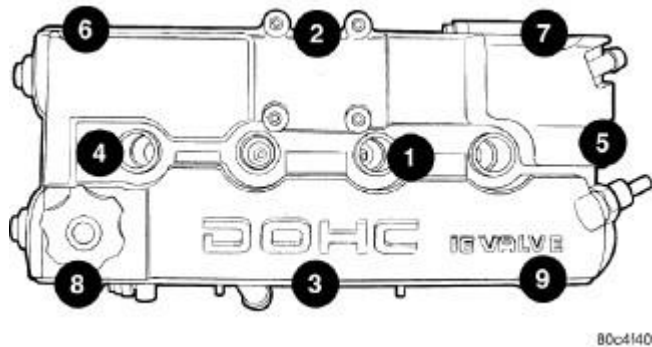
Cylinder Head Cover Tightening Sequence (Typical Cover Shown)
